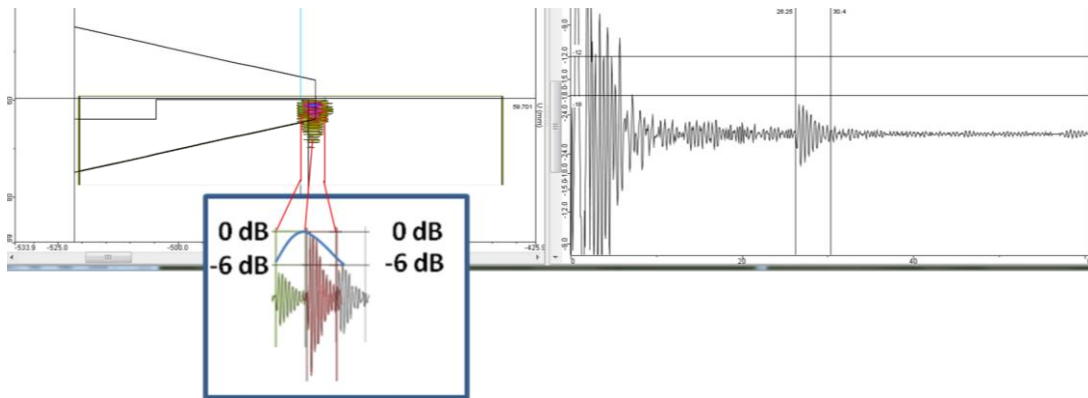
Sizing by 6 dB drop method for the weld defect.
